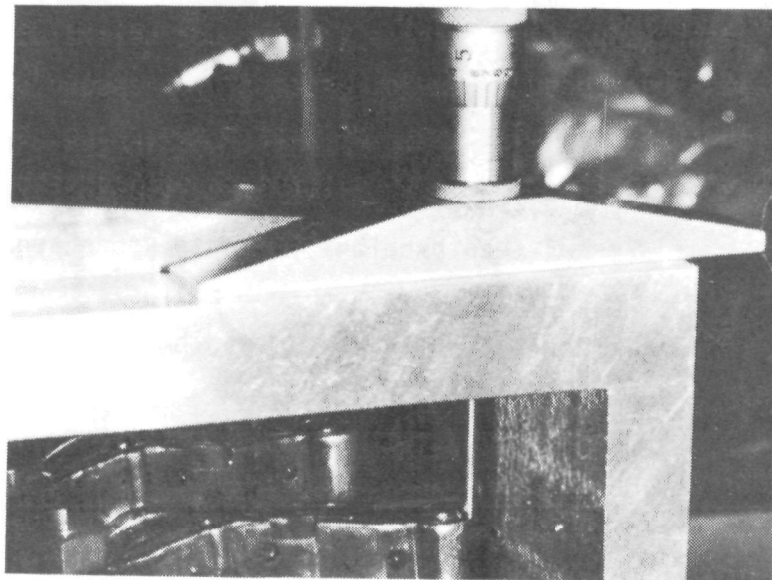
Recession measurement jig--Farmall "H" engine.
